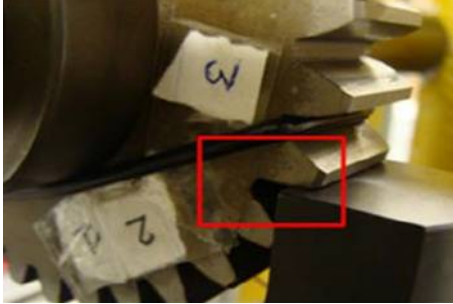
Gear Surface Crack/Wear Acoustic Test Set-up
